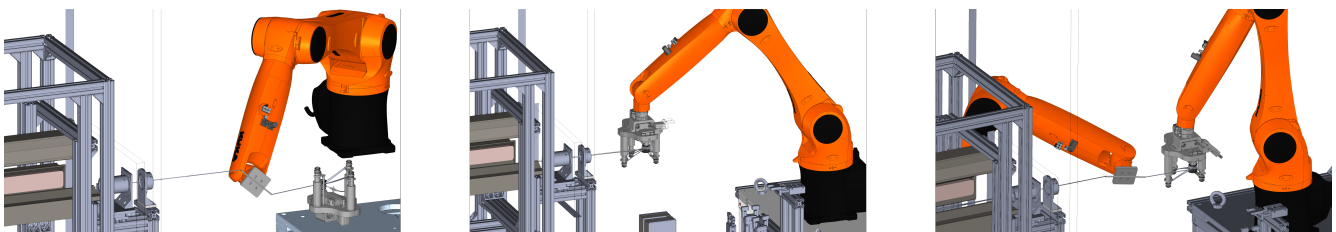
Process variants of coreless 3D filament winding processes: (a) robot-manipulated fiber guide - stationary winding tool position (left); (b) stationary fiber guide - robot-manipulated winding tool position (middle); (c) robot-manipulated fiber guide - robot-manipulated winding tool position (right)
